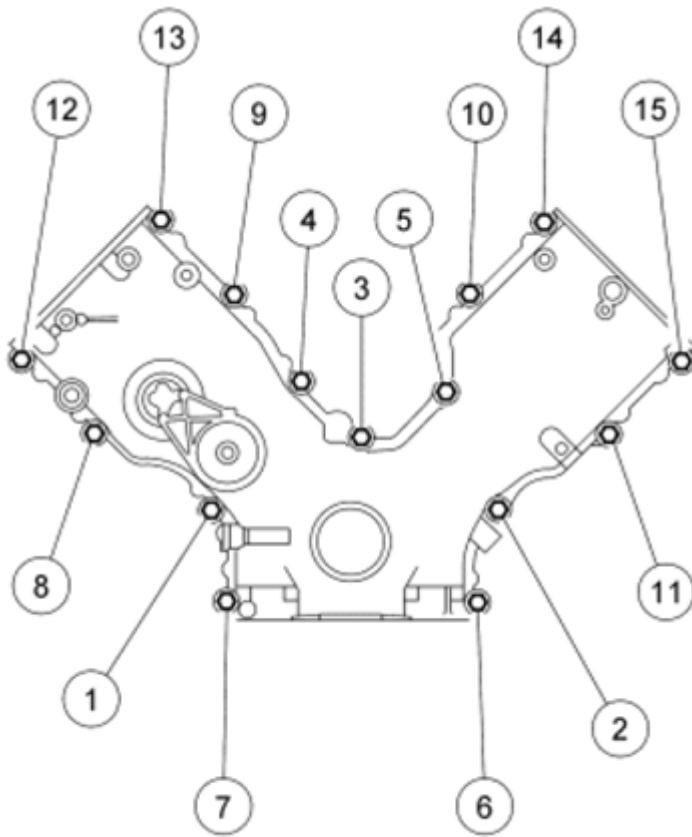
Installing Engine Front Cover On Front Cover-To-Cylinder Block Dowel
